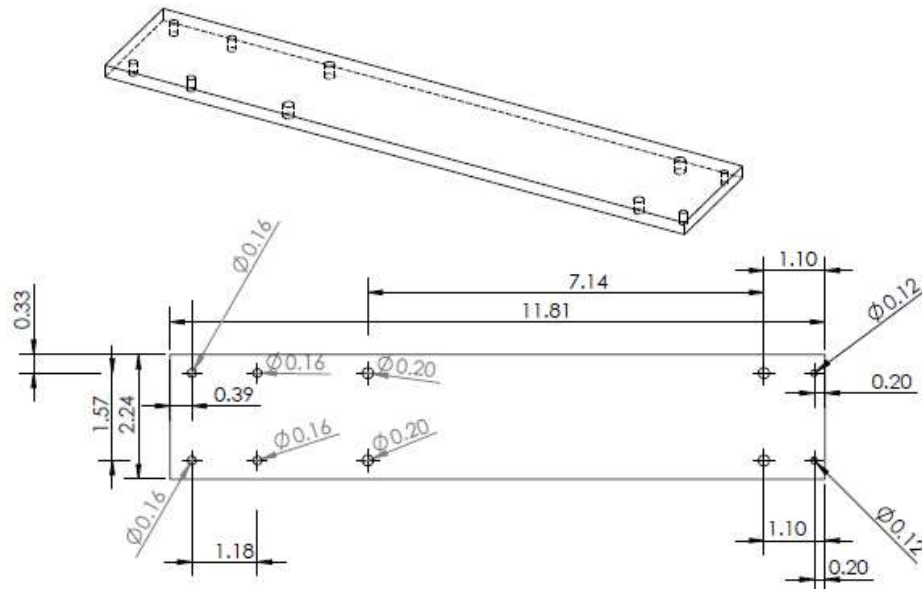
Figure K. The dimensions of an Aluminum plate of 0.19 inches thick, used to prevent uneven movement of the roller.
